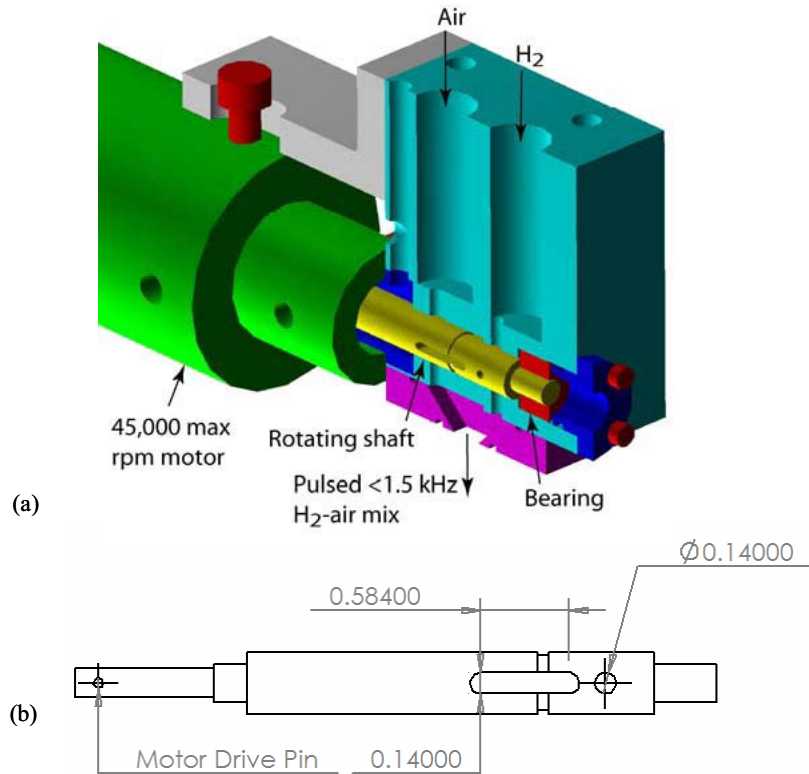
(a) Cut-away view of high-speed valve assembly, from Cutler *et al.*[2][15]; (b) Detail of rotating shaft, dimensions in inches.
